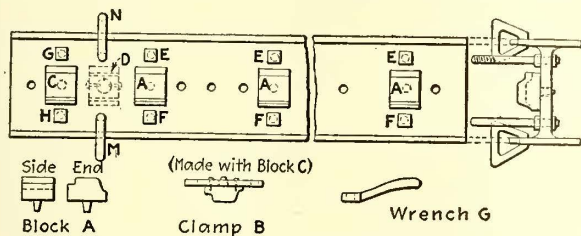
DEVICE FOR MAKING OFF-SET BEND
